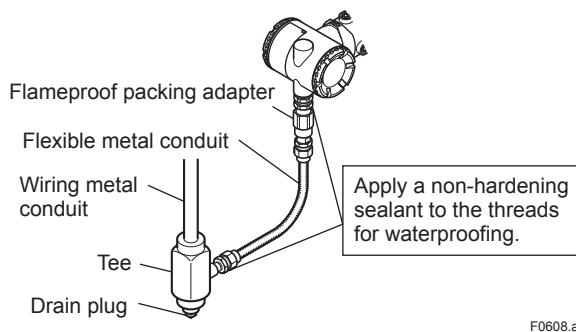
Typical Cable Wiring Using Flameproof Packing Adapter
